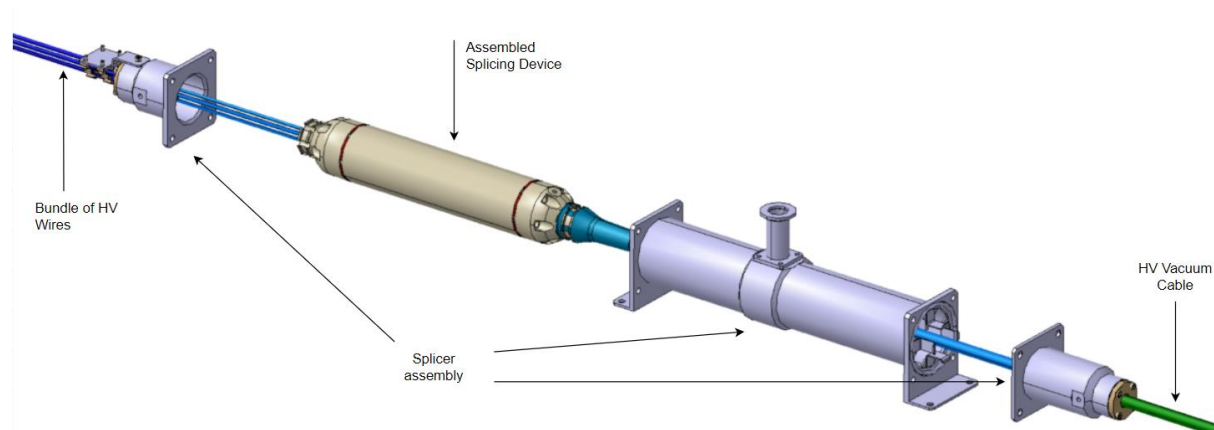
Overview of the Splicing Device and Splicer assembly.
